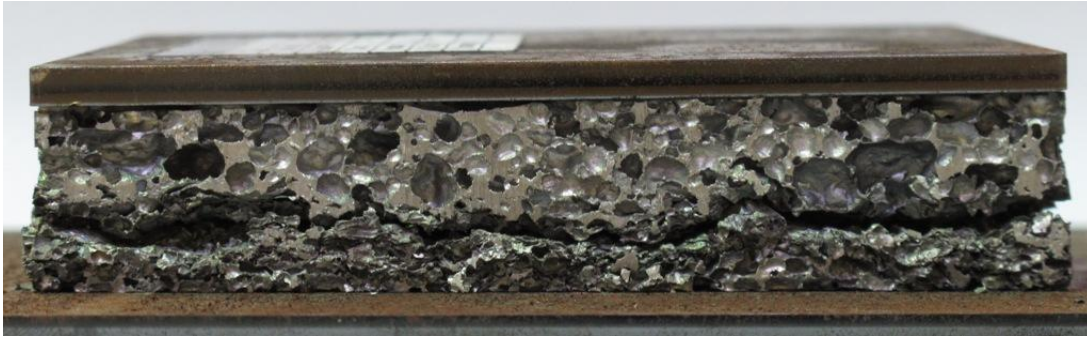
Specimen fracture in bonded specimen C4 (18 grams)
